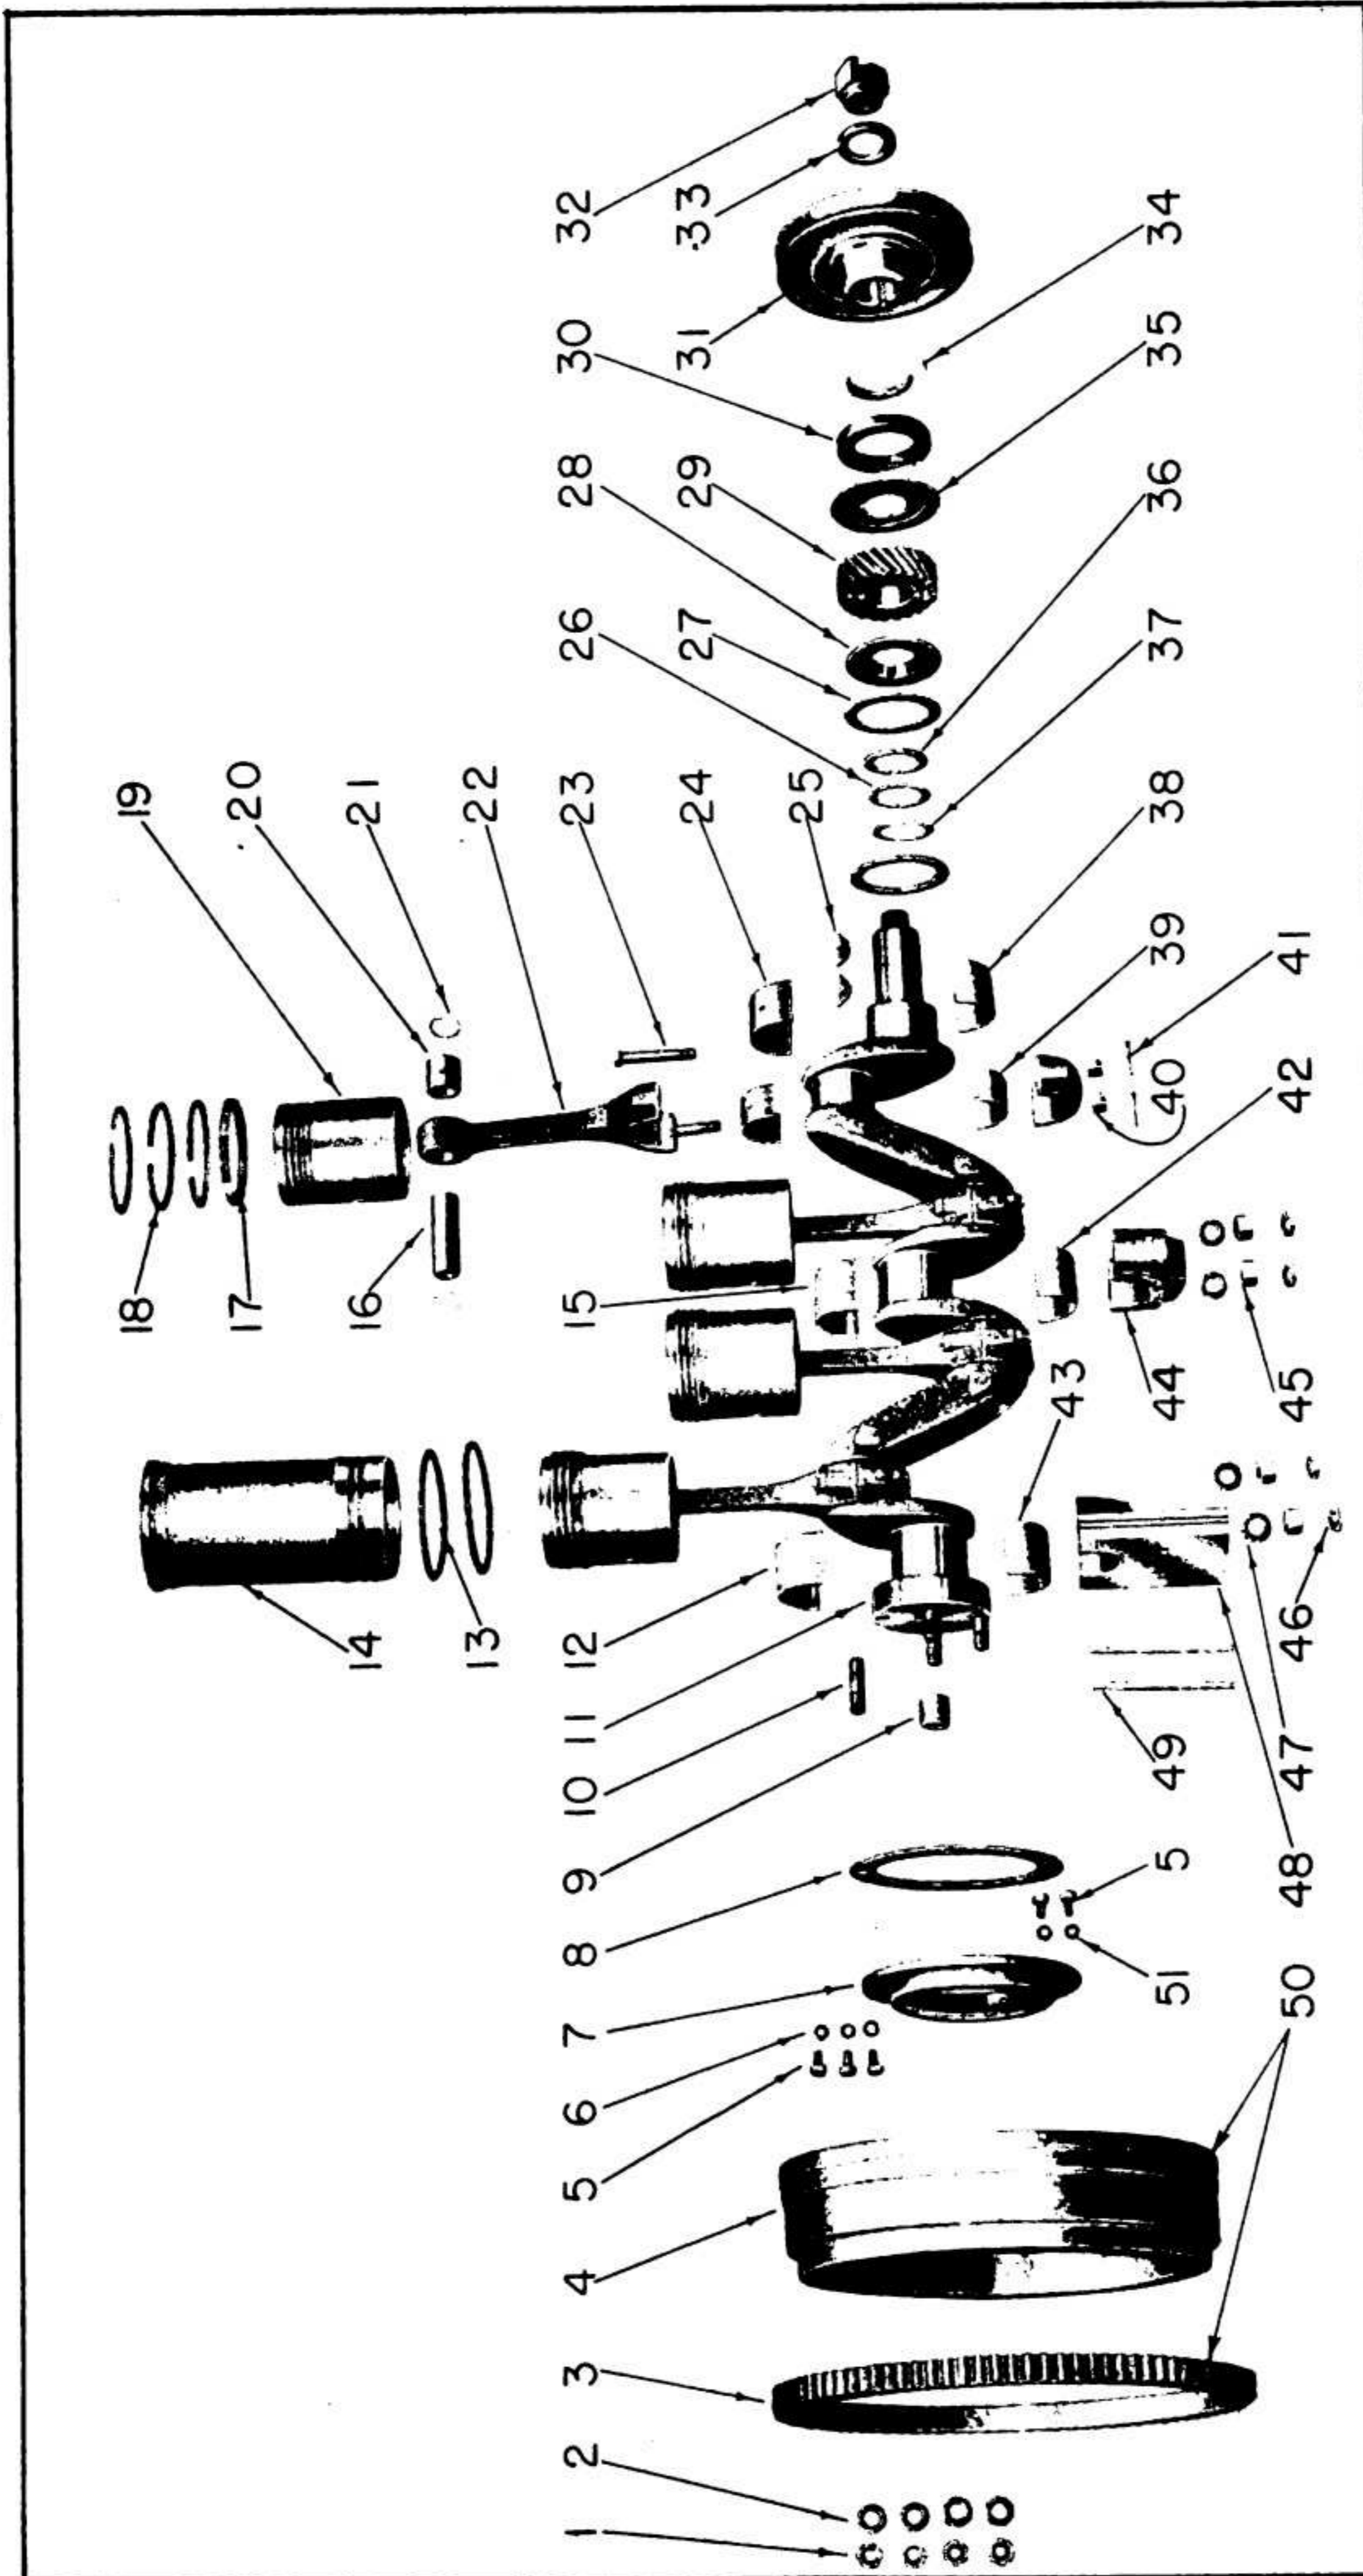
0103 CRANK SHAFT AND PISTONS
